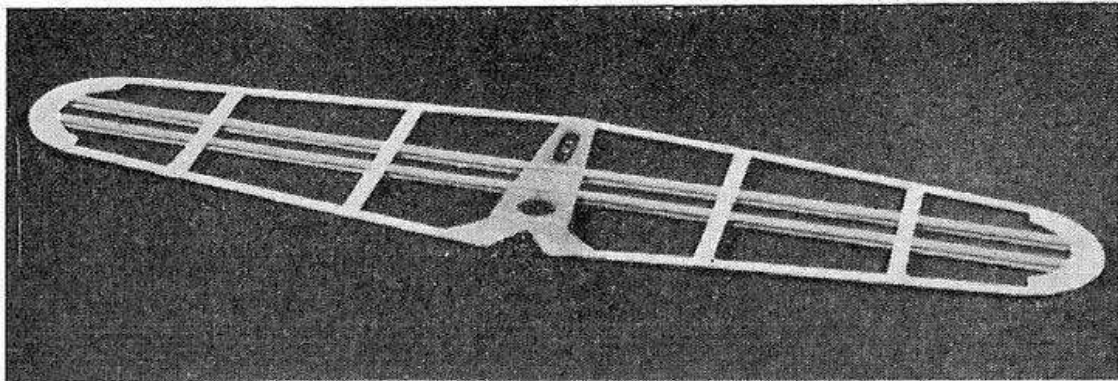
All-balsa, built-up tail plane. Note semi-circular tips of sheet balsa and twin main spars
